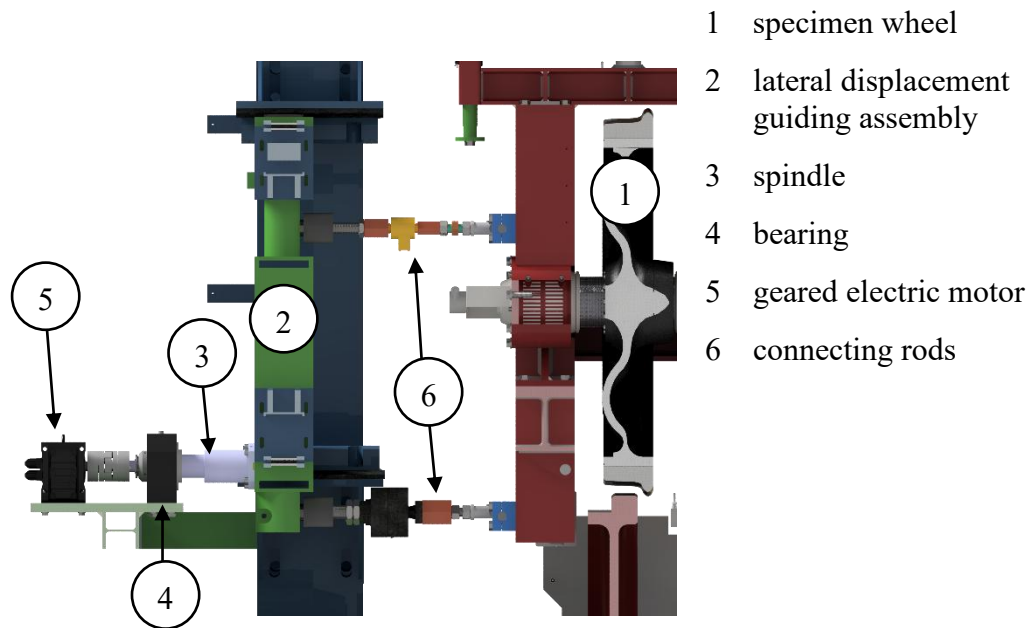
Lateral displacement mechanism (cross section view of roller rig)
